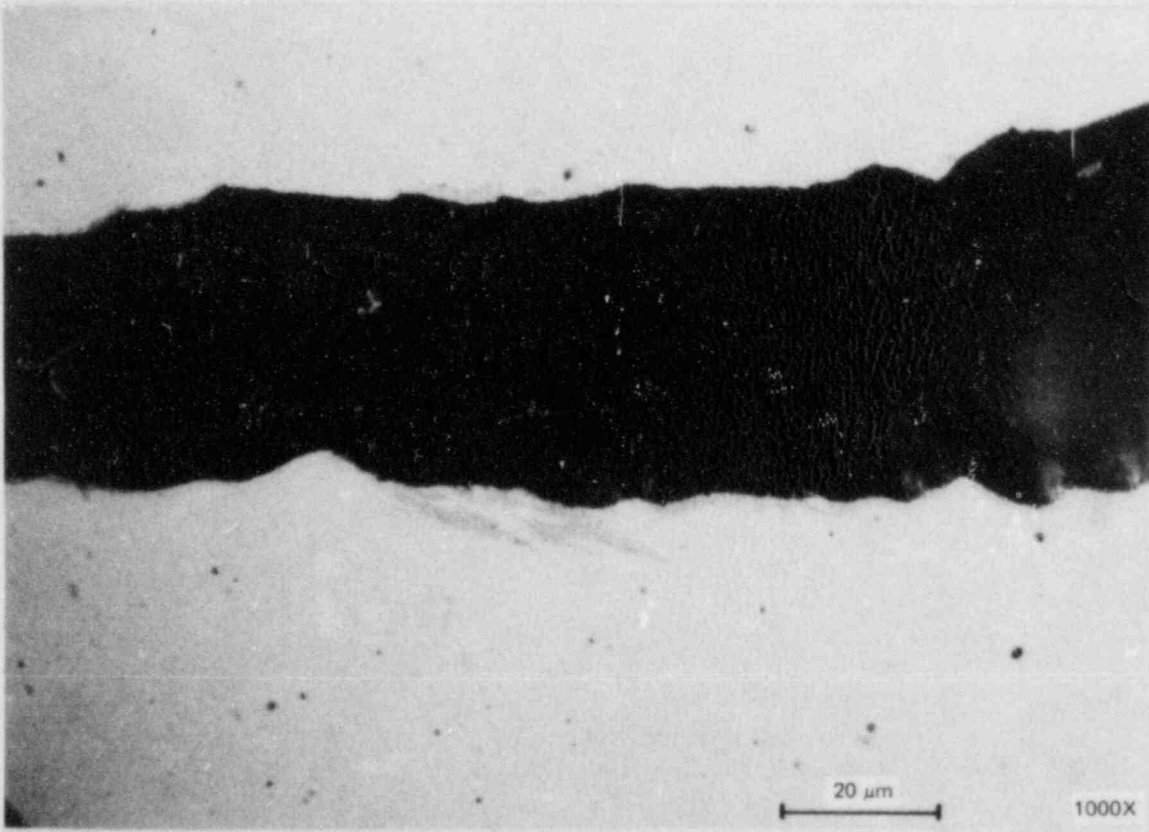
Detail of location 3 in Fig. 6.14 showing splitting of ferrite in forming side crack in type 309 weld metal.
